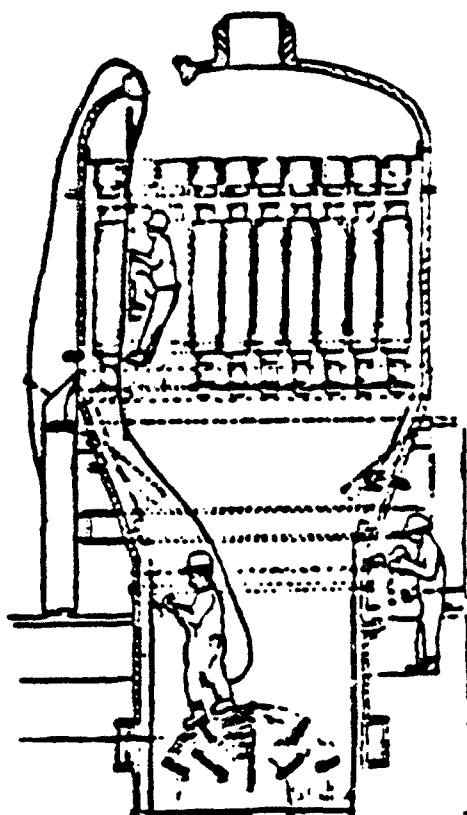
STEAM GENERATOR DISASSEMBLY
